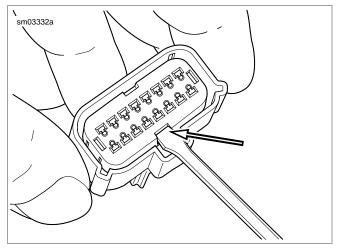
Secondary Lock Pry Slot (Socket Housing)
